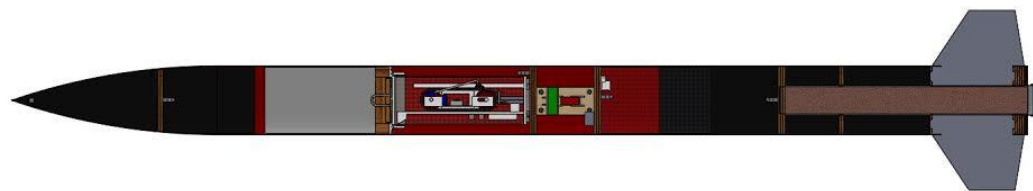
Cutaway View of Detailed SolidWorks Model
